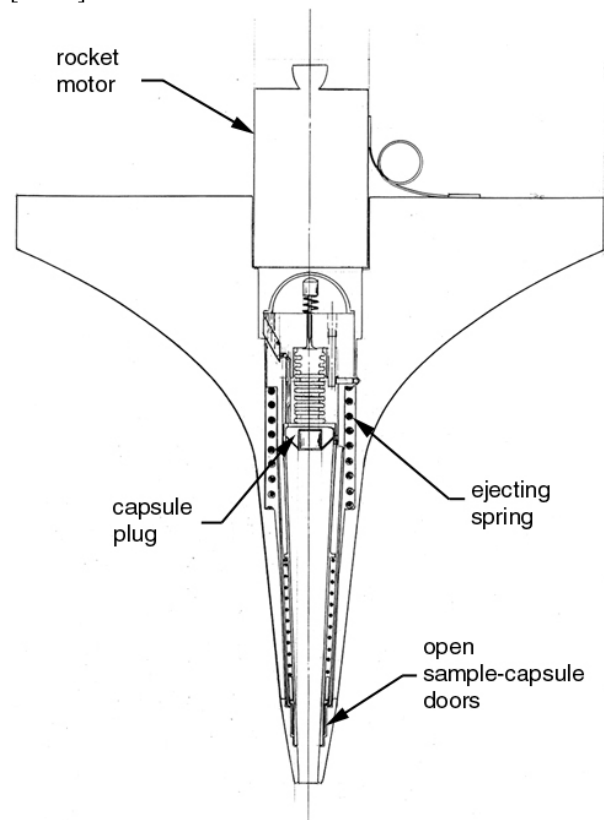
Possible flight configuration of penetrator. Solid rocket motor would accelerate penetrator into target and be jettisoned. Sample capsule would be ejected from the rear, through the space formerly occupied by the rocket motor.
